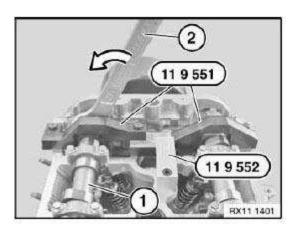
Special Tool (11 9 522) And (11 9 551) Courtesy of BMW OF NORTH AMERICA, INC.
